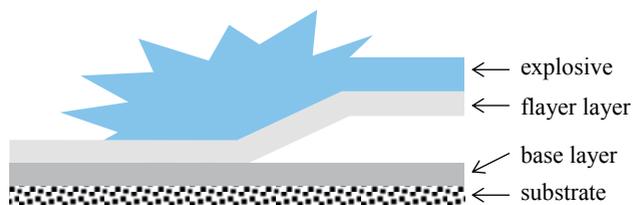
Scheme of explosive welding with longitudinal layer configuration.
